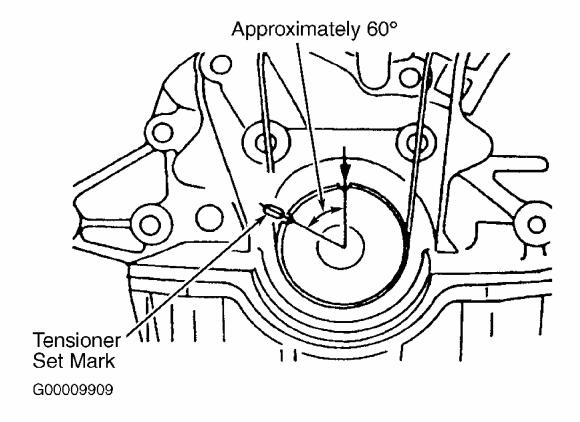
Locating Tensioner Set Mark (Miata) Courtesy of MAZDA MOTOR CORP.
